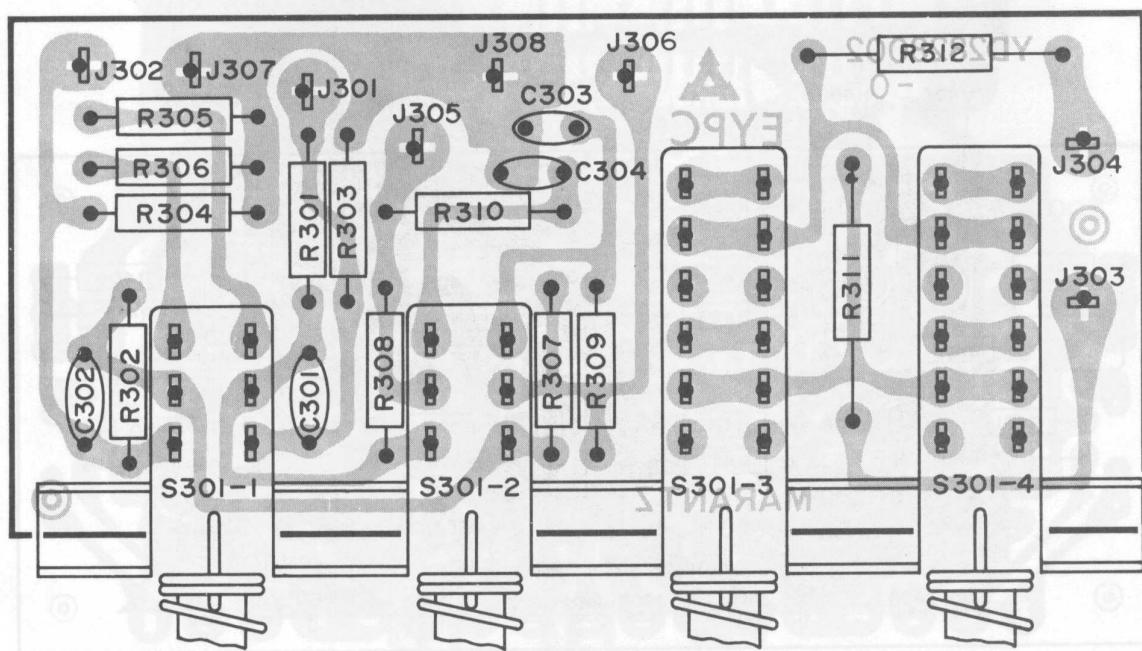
Main, Remote, High and Low Filter Unit Assembly P300 Component Locations
